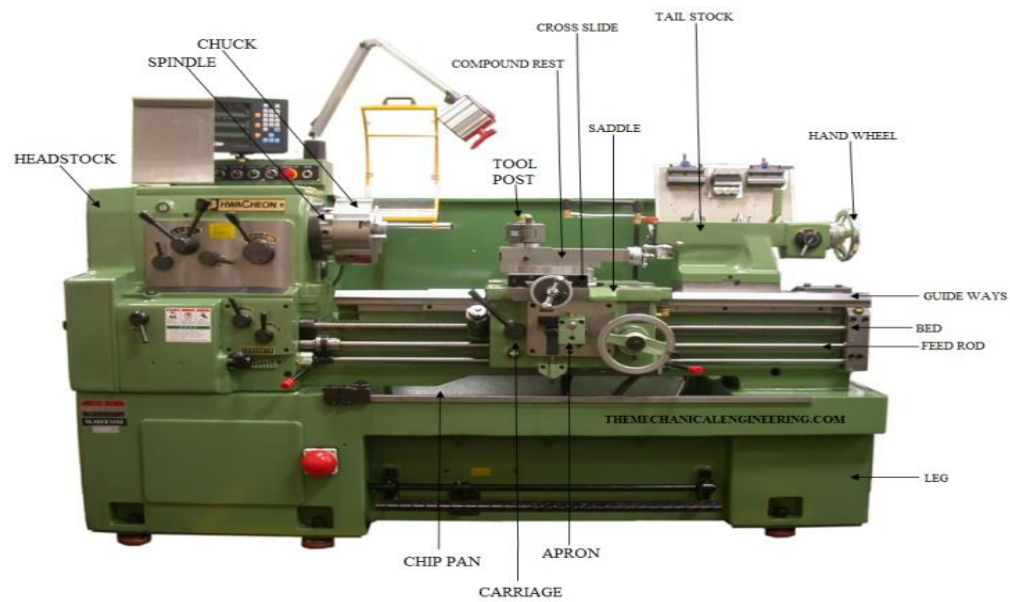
Schematic Diagram of Lathe Machine (Ref-www.google.com)
